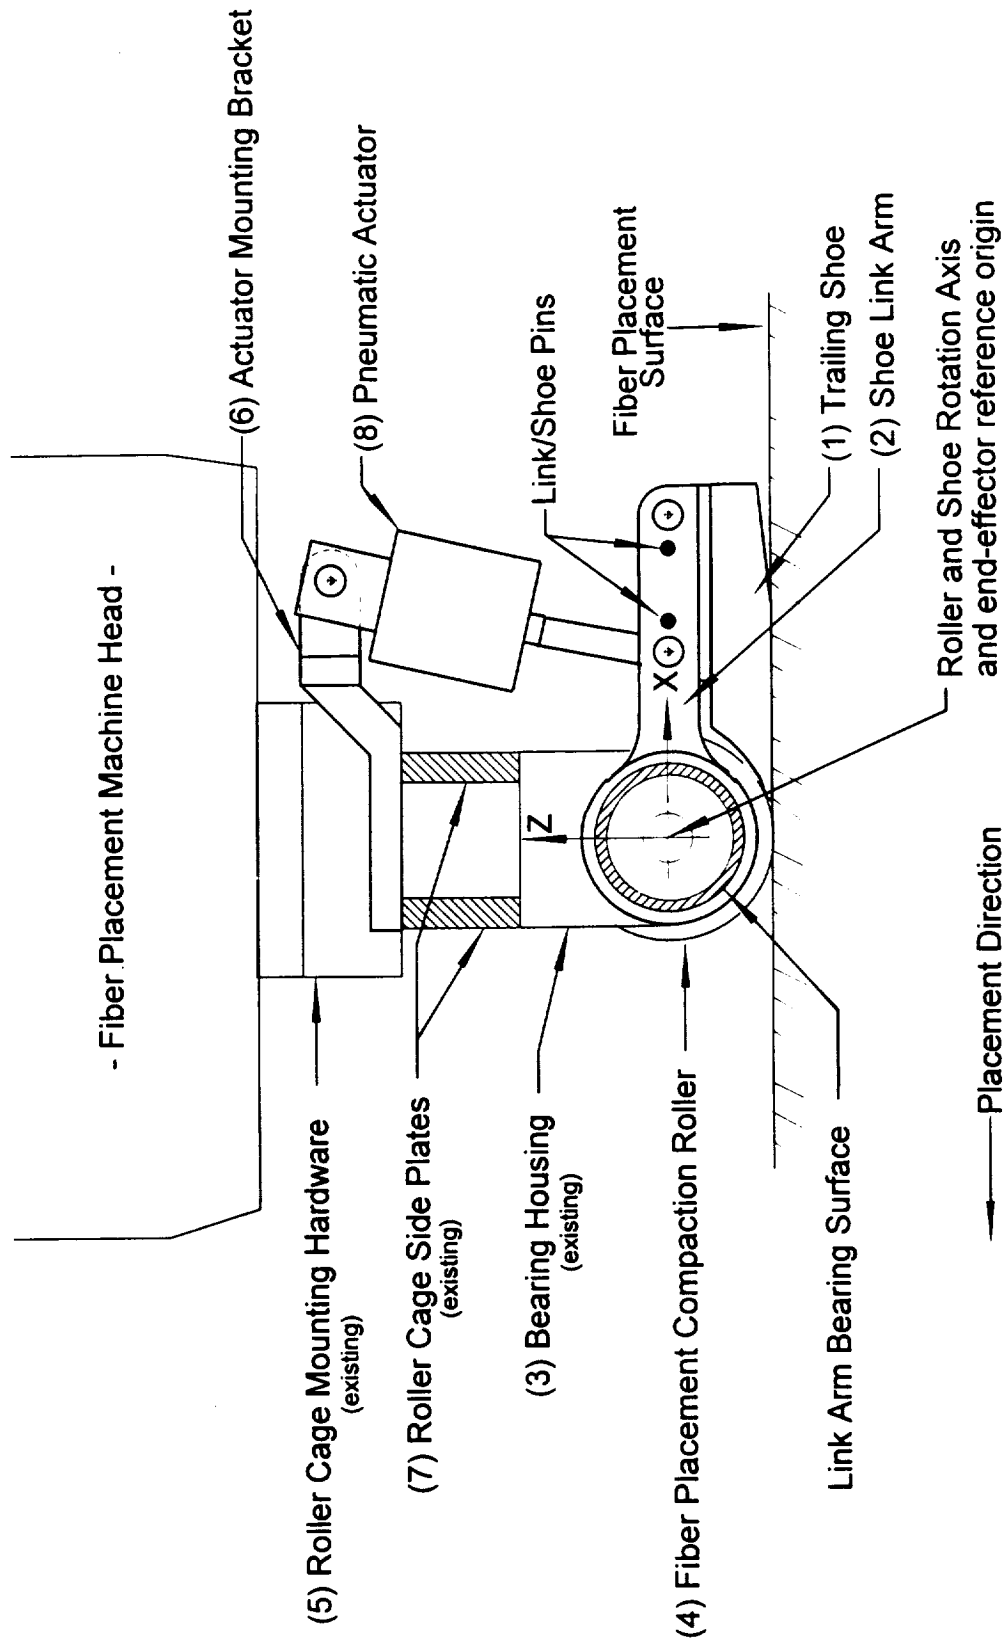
Side view of roller cage/trailing shoe assembly with shoe in full extend mode on flat placement tool surface.
